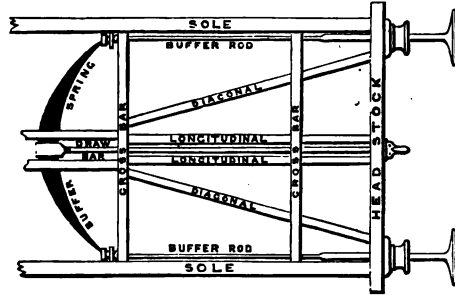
Half plan of underframe showing transverse buffer and draw-bar spring.
